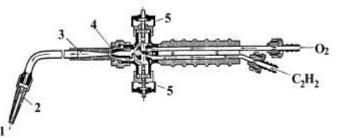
Gas welding torch: 1 – fuel mixture; 2 – tip; 3 – mixture chamber; 4 – injector; 5 – valves
